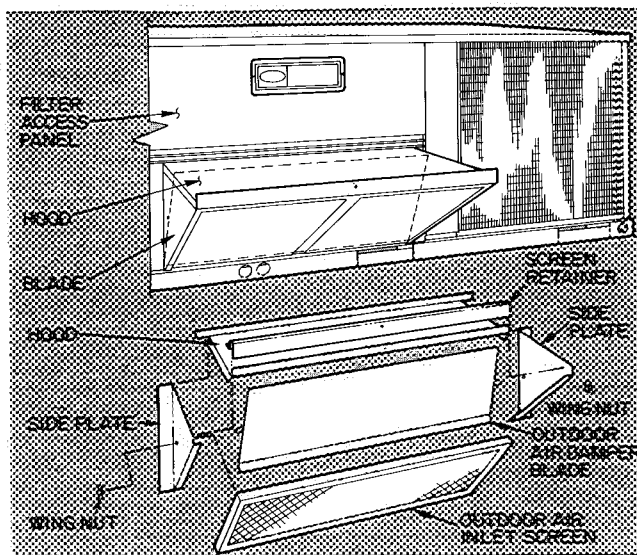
Outdoor Air Damper and Hood Installation and Details (004,005,006,007 Units)
